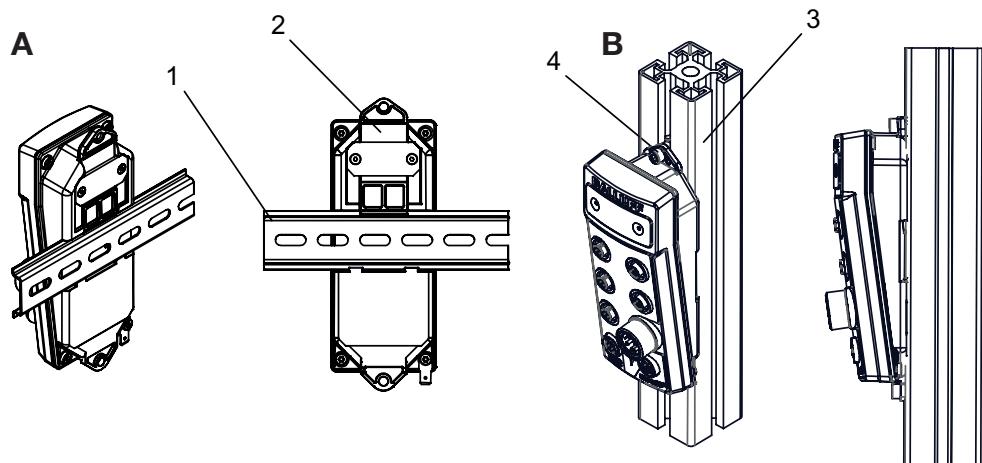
Installation examples (A: attachment to DIN rails, B: attachment to T-slotted framing)
